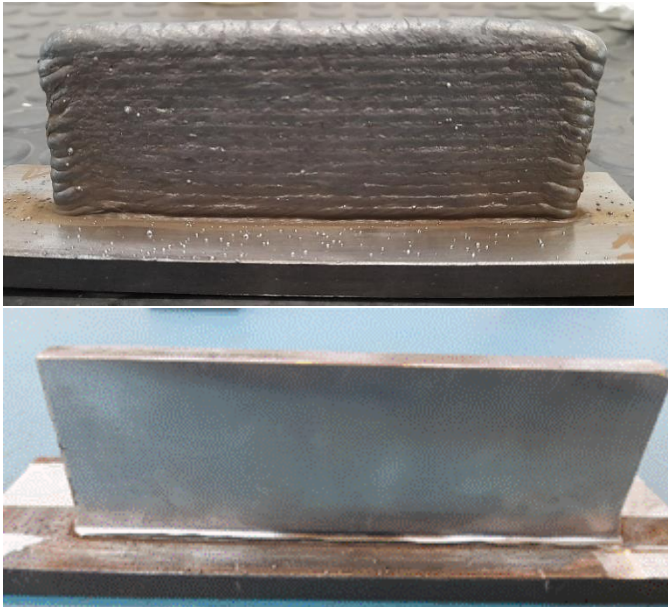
NNS walls manufactured before and after machining of the surfaces.
